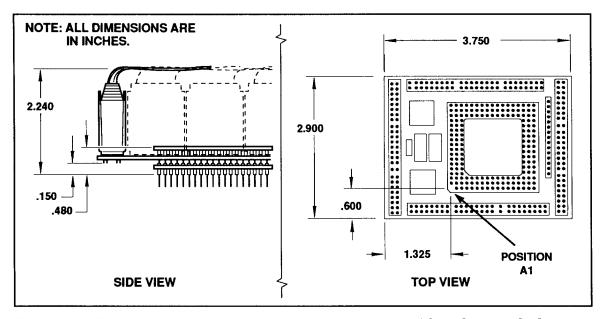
Minimum clearance of the standard probe adapter with probes attached.
